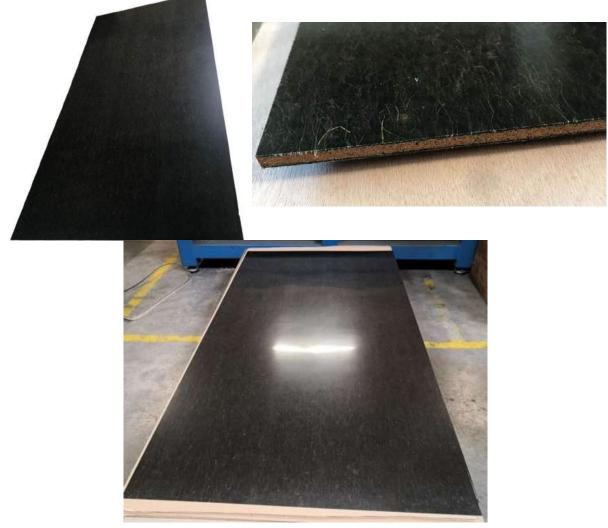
5-sandwich sheet, full sheet and surface finish
